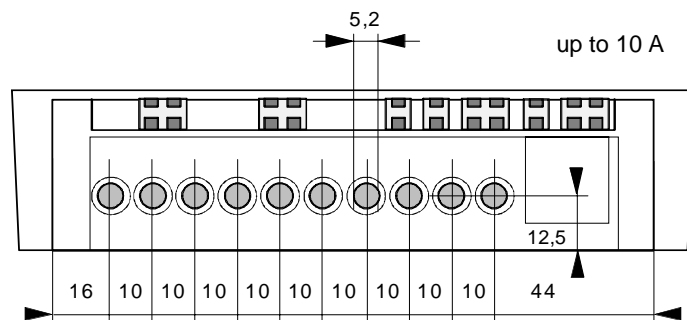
Terminal dimensions for terminal for transformer connection, Z.B405/410CT
